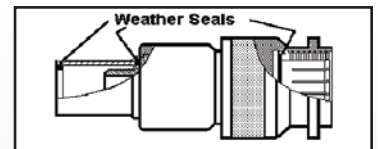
Typical connector weatherproofing. Shows recommended extra protection of dual-wall shrink tube over cable and connector. This covering might also be a wrapped sealant mentioned in the text below, and could cover the entire connection as well.
